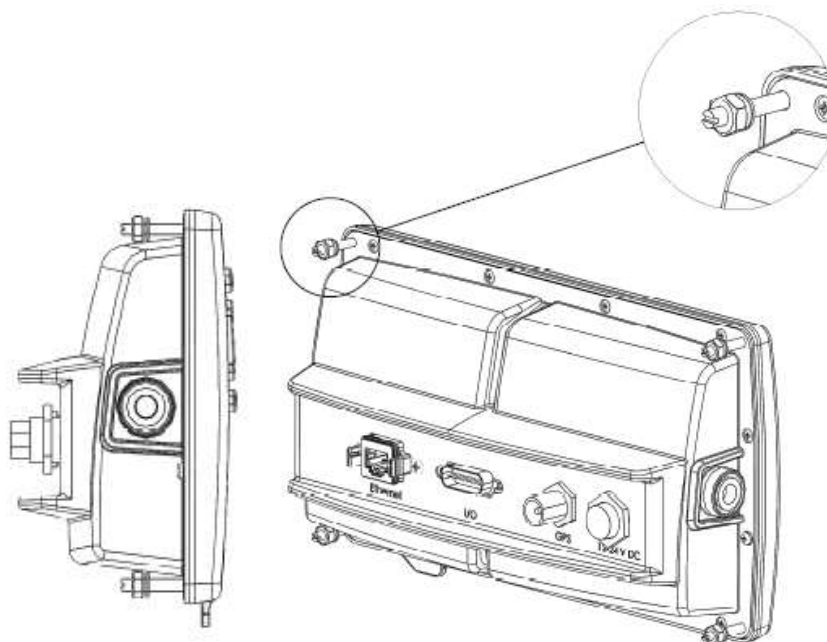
R5 SUPREME CDU, Mounting mount screws
